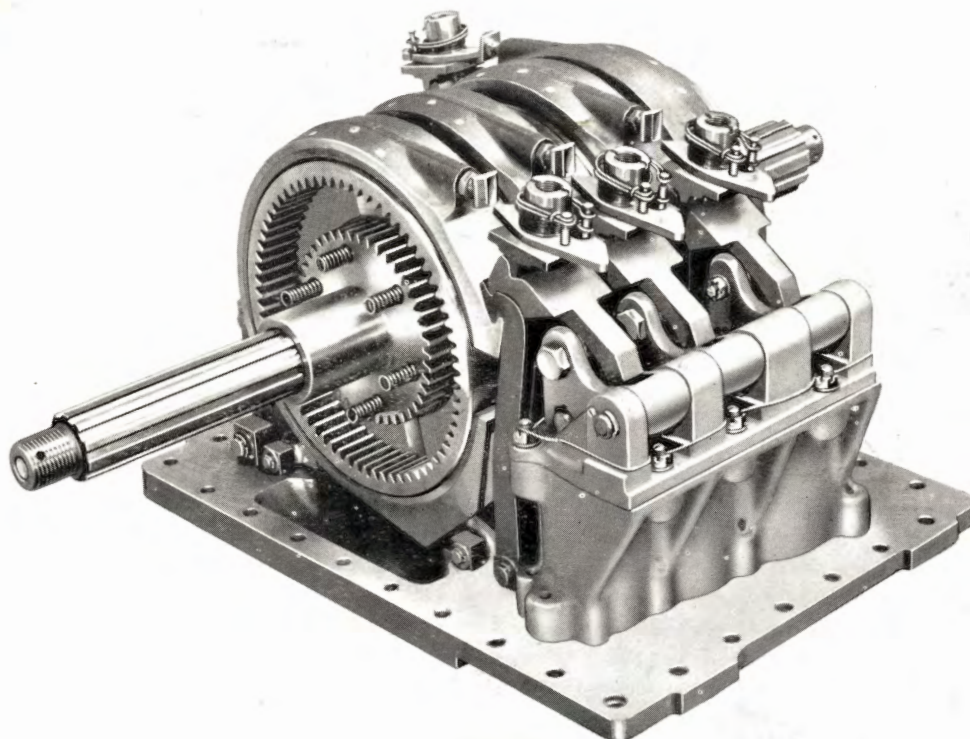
VIEW TO SHOW RUNNING GEAR AND BRAKE BANDS
